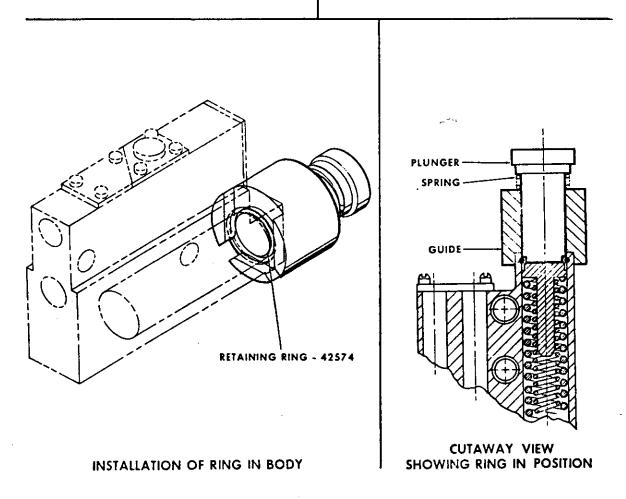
Installation of Retaining Ring, Part No. 42574, Using Assembly Aid Tool, T42550-6
